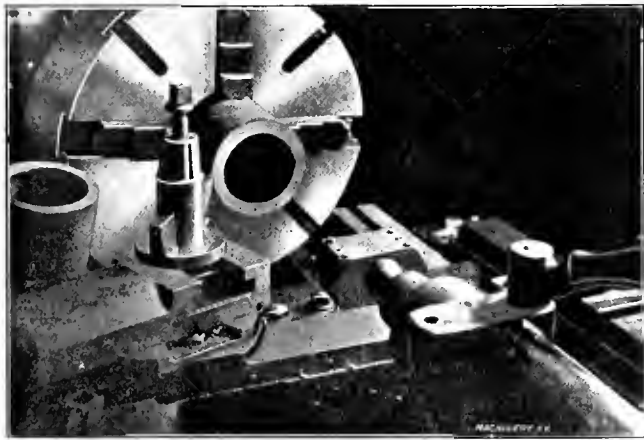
Facing the End, breaking the Inside Edge and boring out the Piston
